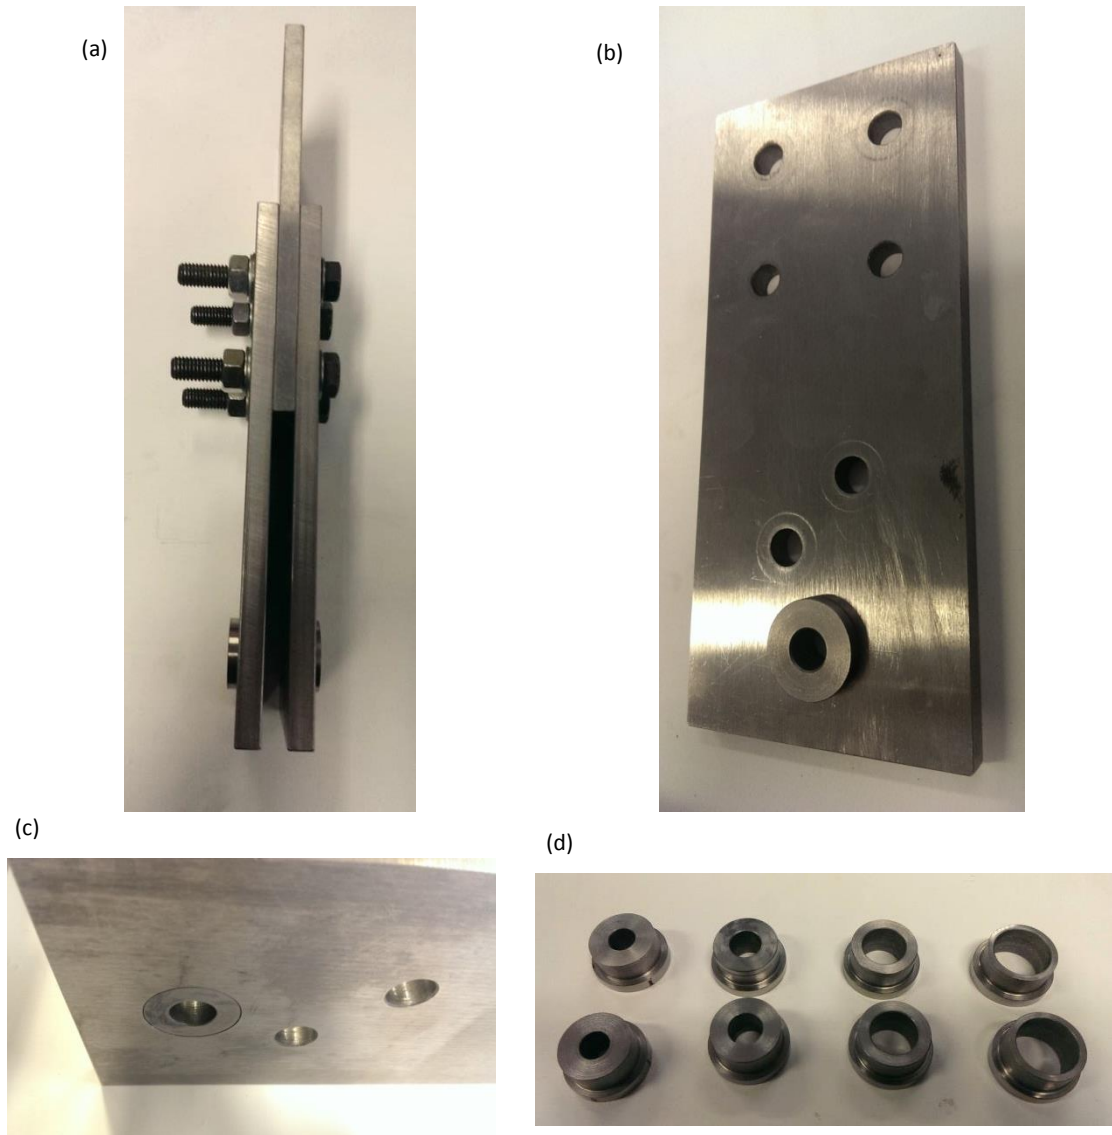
Steel Tension Loading Fixture for (A) Type Bolted Connections Tested with Different Bolt Sizes showing (a) The full fixture, (b) An outer plate with a M12 size bushing, (C) the inner face of the plate with a bushing and (d) Bushings with M10 to M20 size inner diameters
